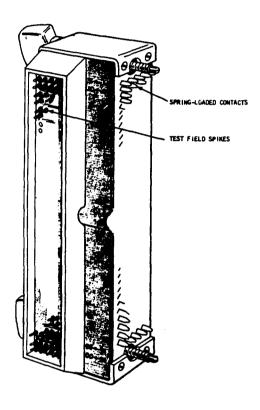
N Test Connector (AT-8882)—For 305-Type Connectors
